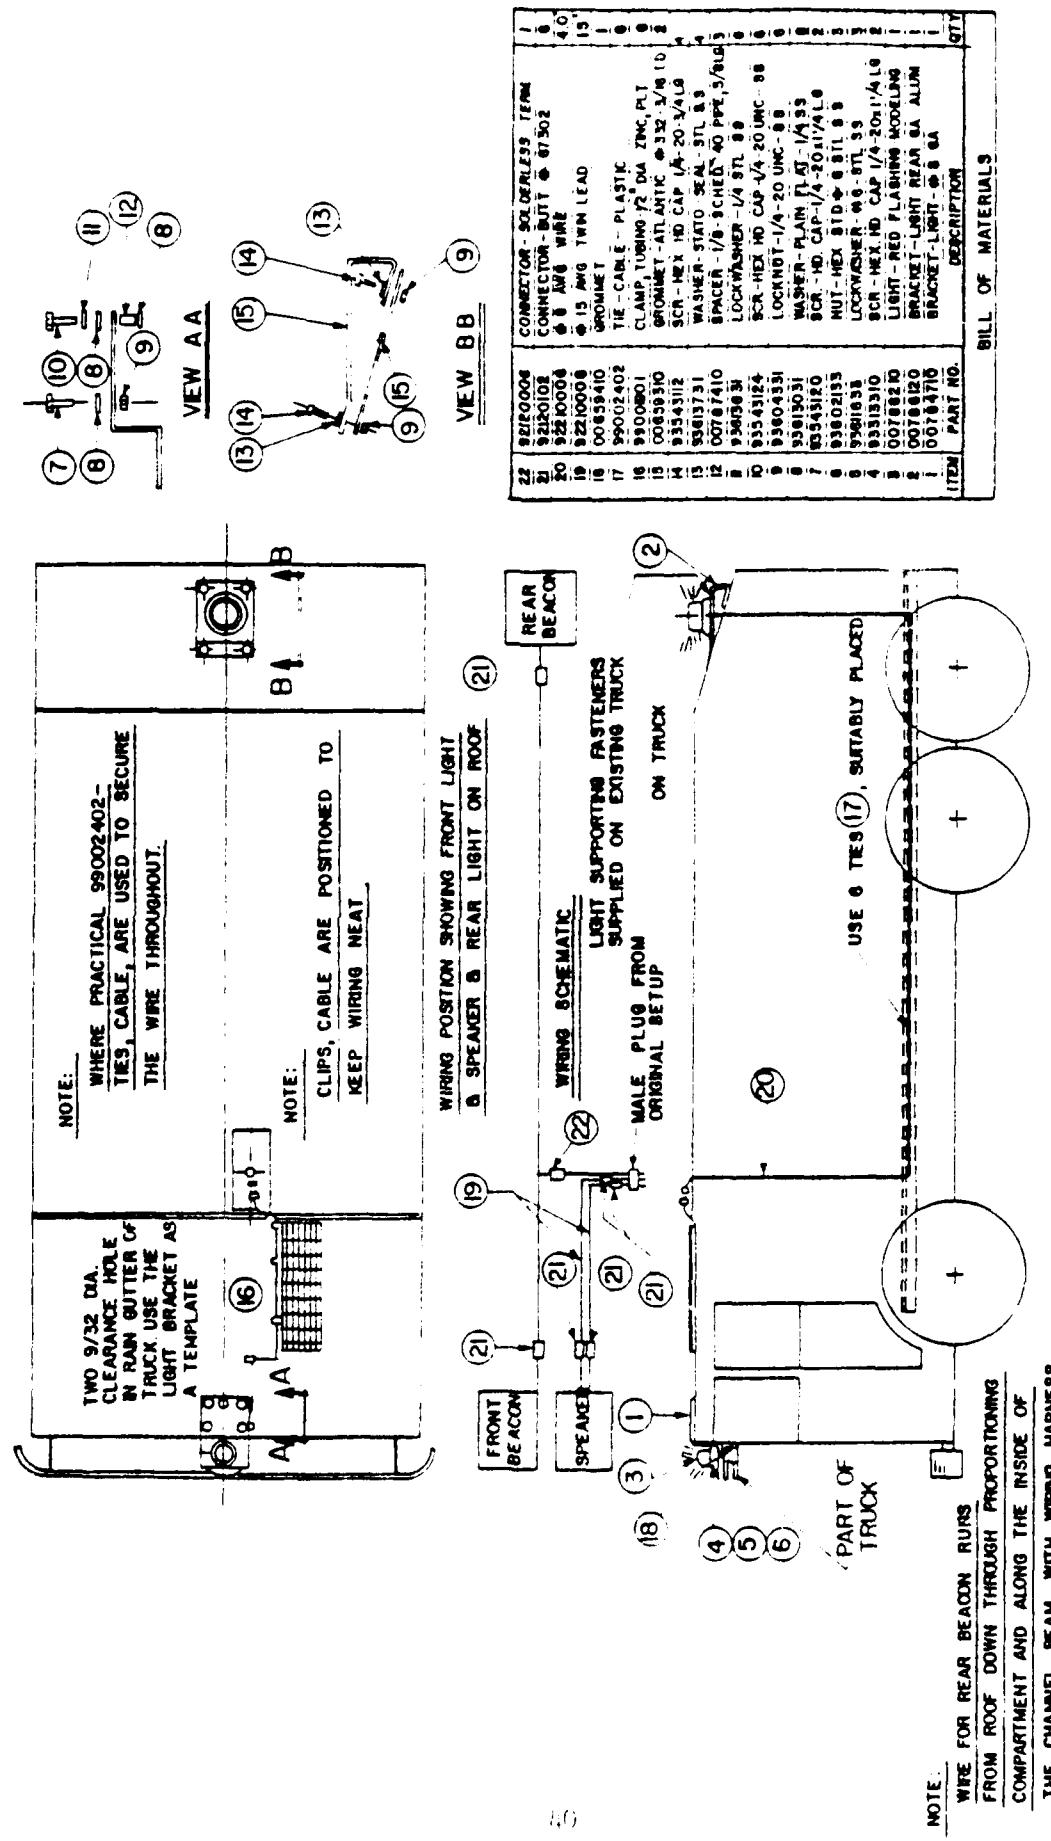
P-4 Speaker & Beacon Lights Wiring Assembly
